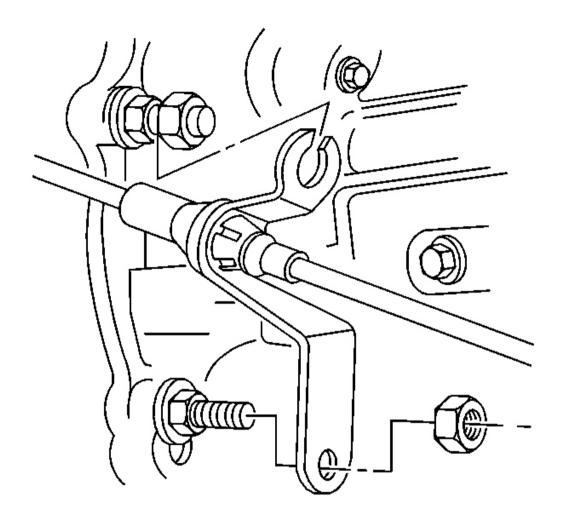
Shift Control Cable Bracket & Nuts Courtesy of GENERAL MOTORS CORP.
